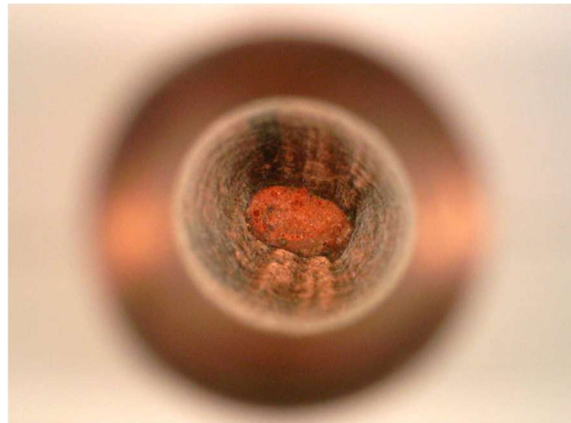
Fractured surface of an initially cylindrical CuCrZr specimen.
